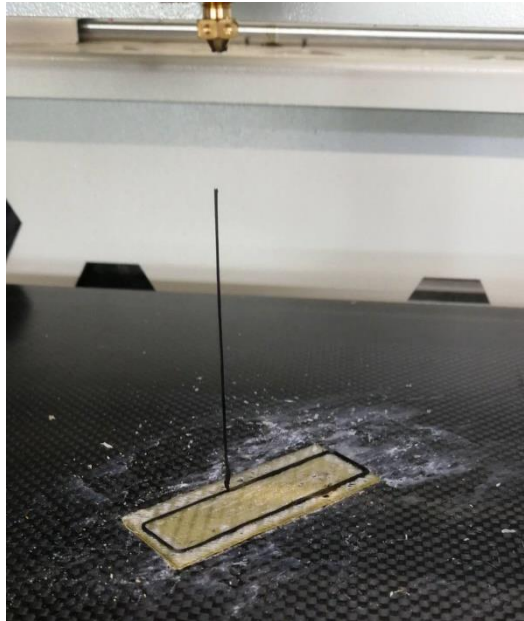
Illustration of a printed CF/PEEK part in the final step.
